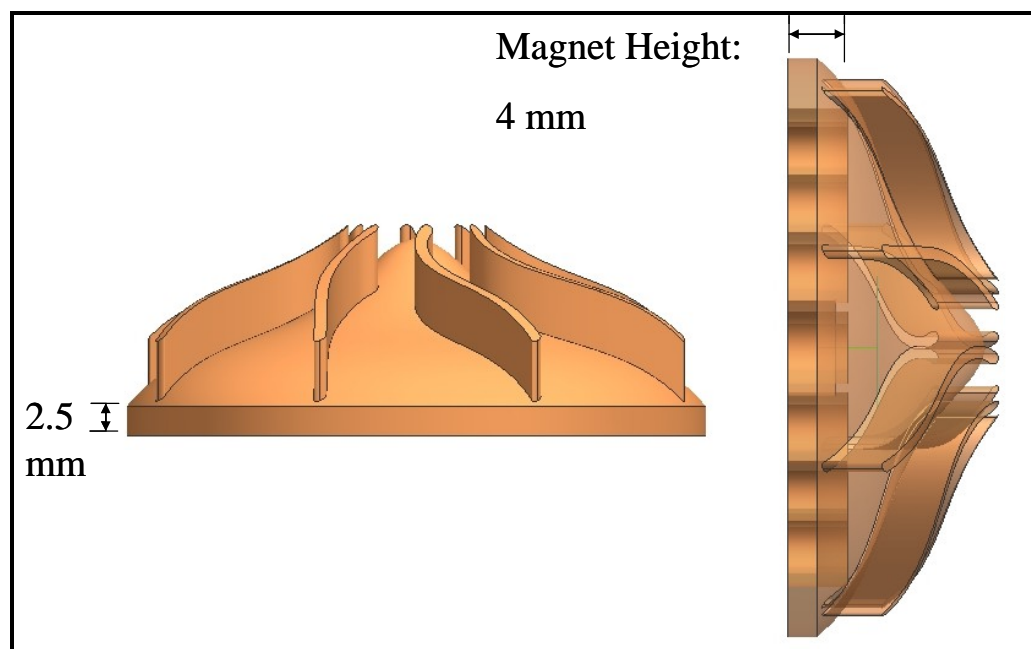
The final design of the impeller that will be manufactured from Ti6Al4V
